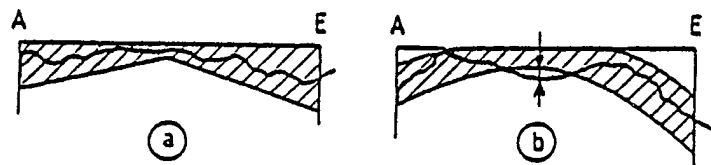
Inspection of profile accuracy by the tolerance field method
